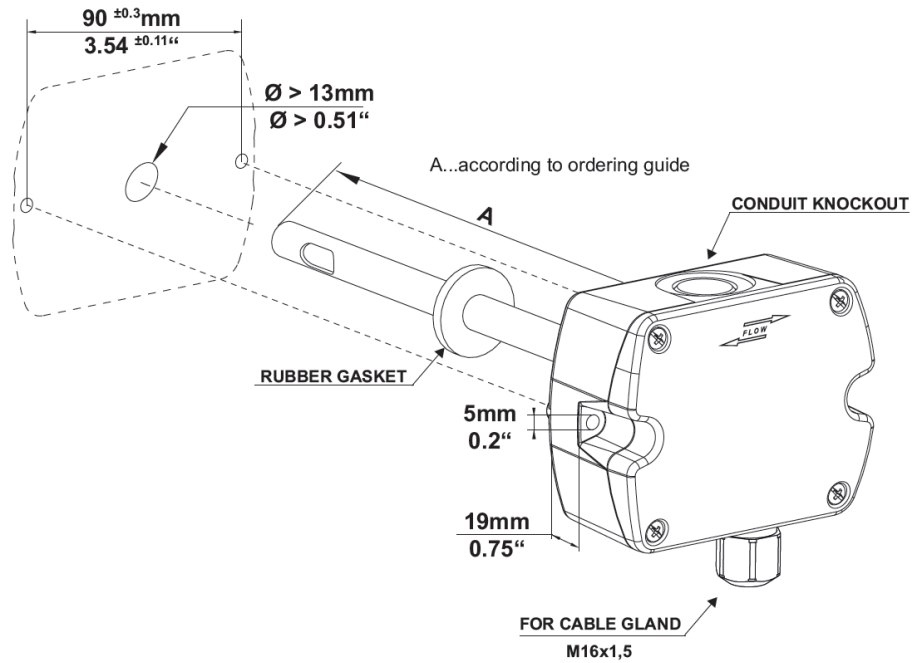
Direct mounting on duct (probe length A = 200 mm)
